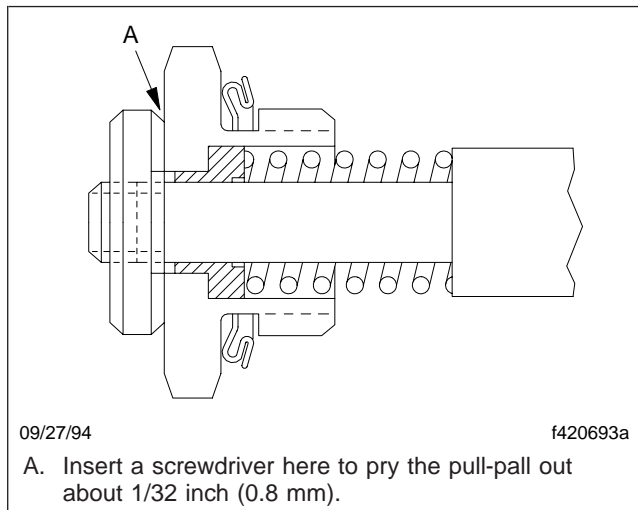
, Disengage the Pull-Pull on Meritor Automatic Slack Adjusters
